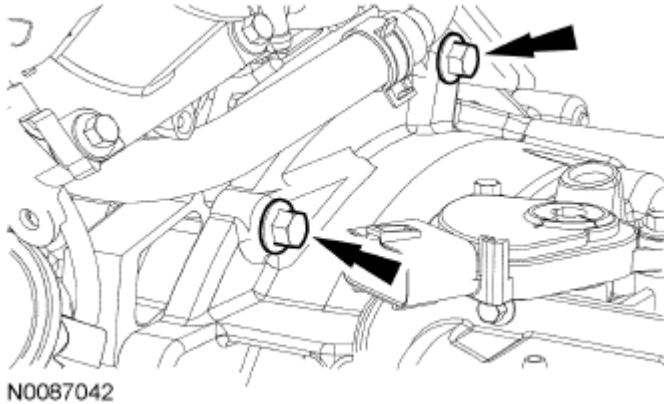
Locating Upper Bellhousing-To-Engine Bolts
